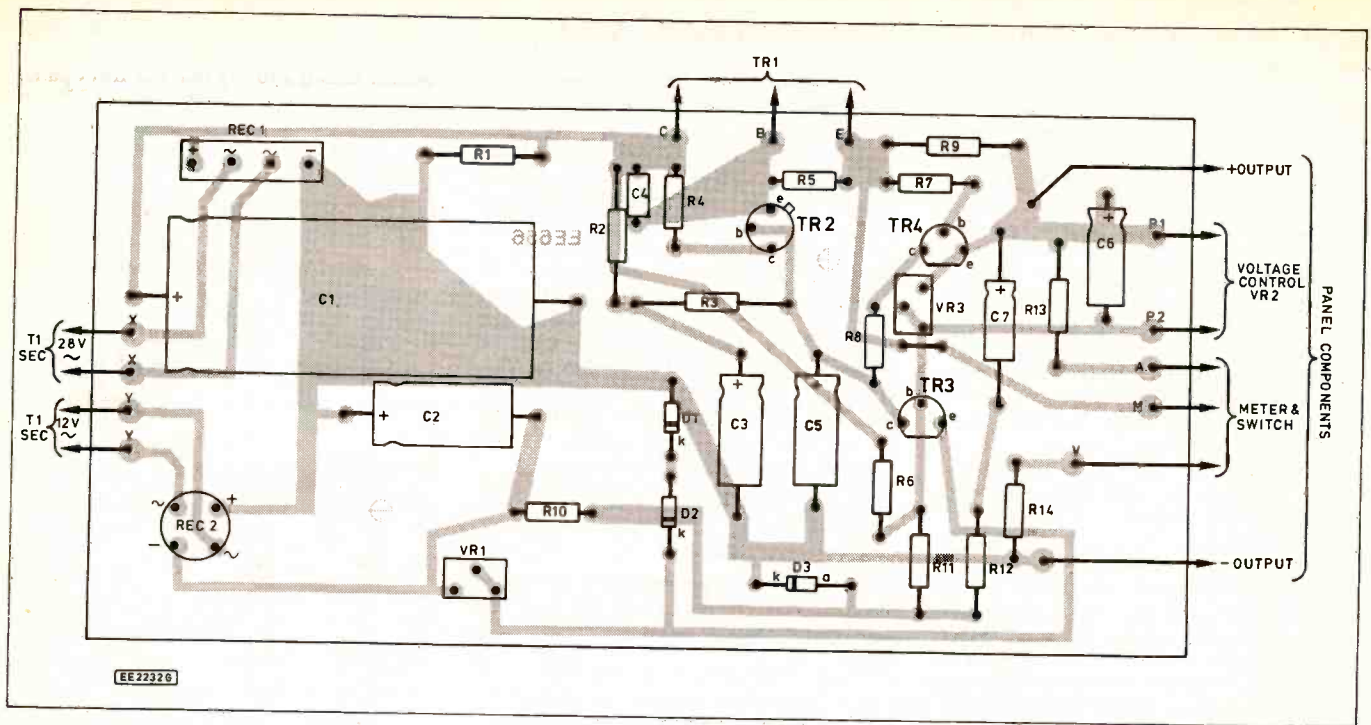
Printed circuit board component layout and full size copper foil master pattern. Drill fixing centres marked "F" to suit mounting spacers.
